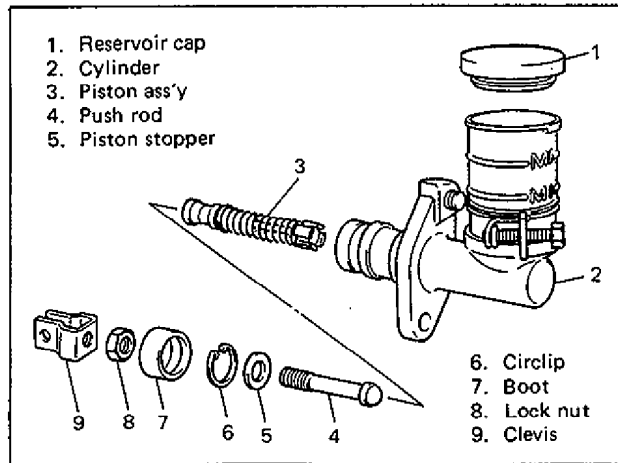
C1-6-1 Component Parts Of Master Cylinder
